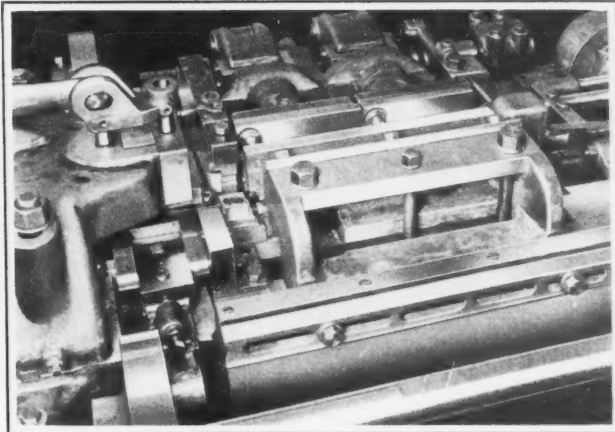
Rear View of Cutting Head Shown in Fig. 7
